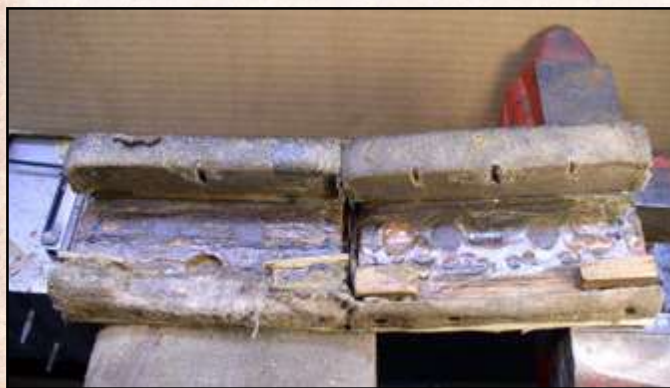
These vise jaw liners look pretty disreputable, but they have served well in holding many pistols during inletting, shaping and finishing.
